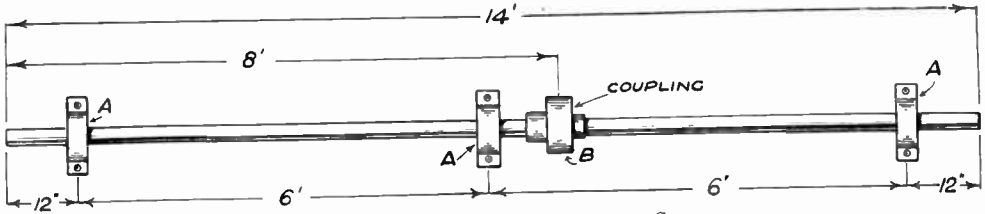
SPACING OF BEARINGS ON SHAFT.
